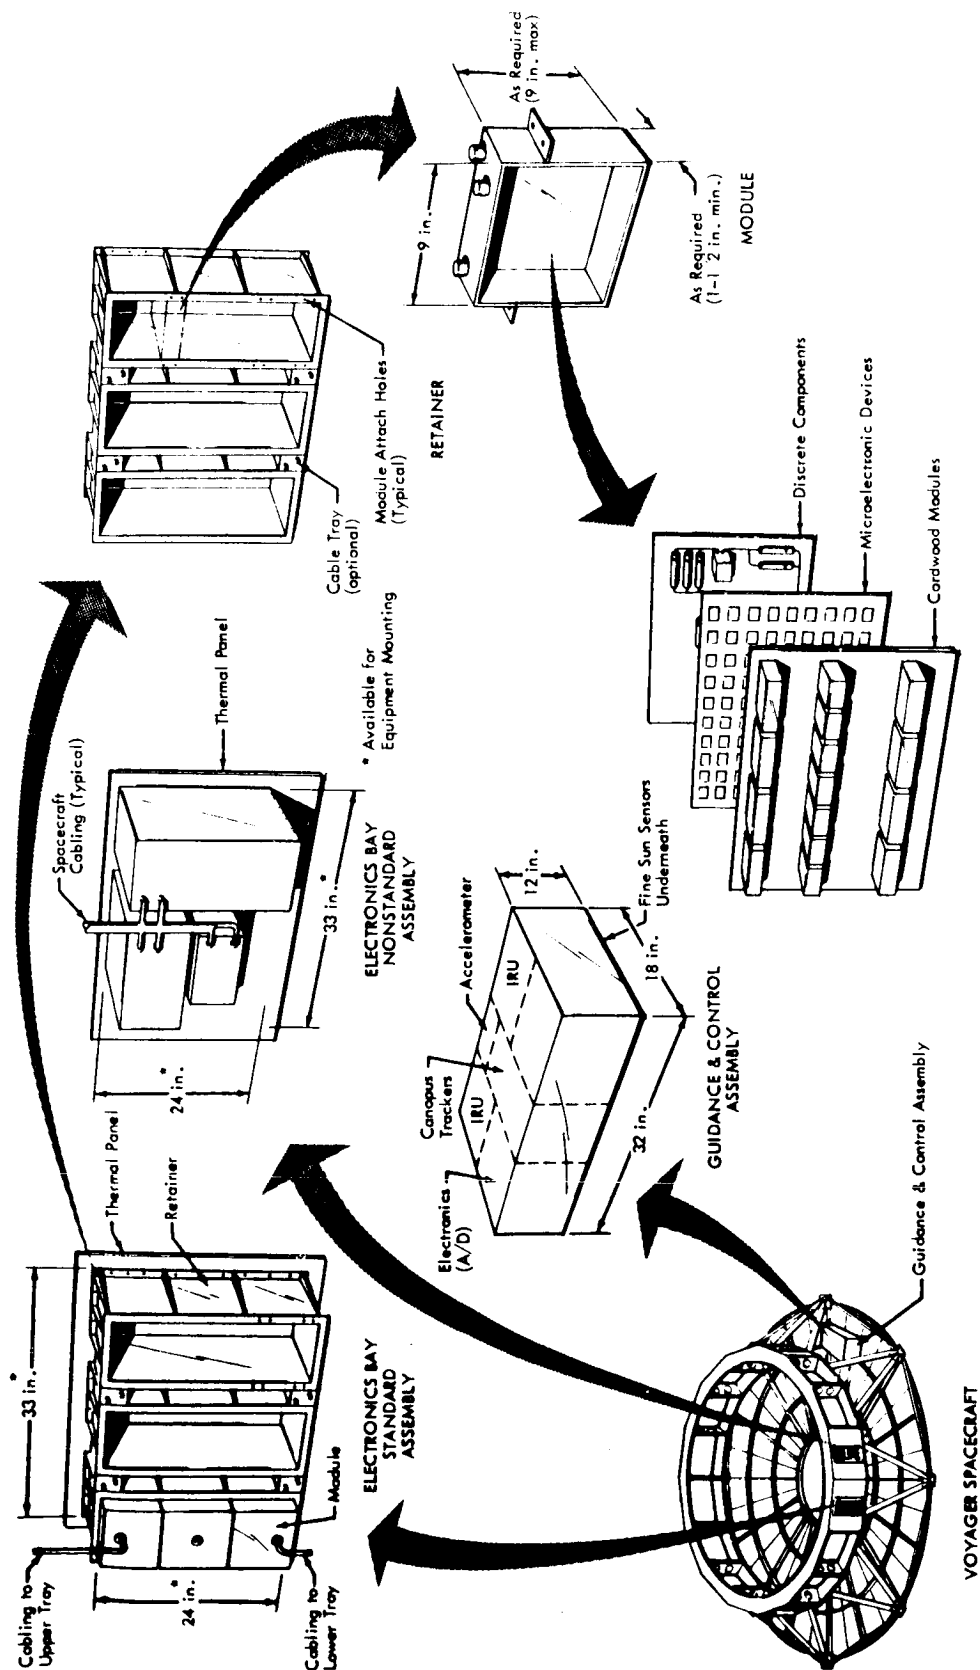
ELECTRONICS PACKAGING CONCEPT
